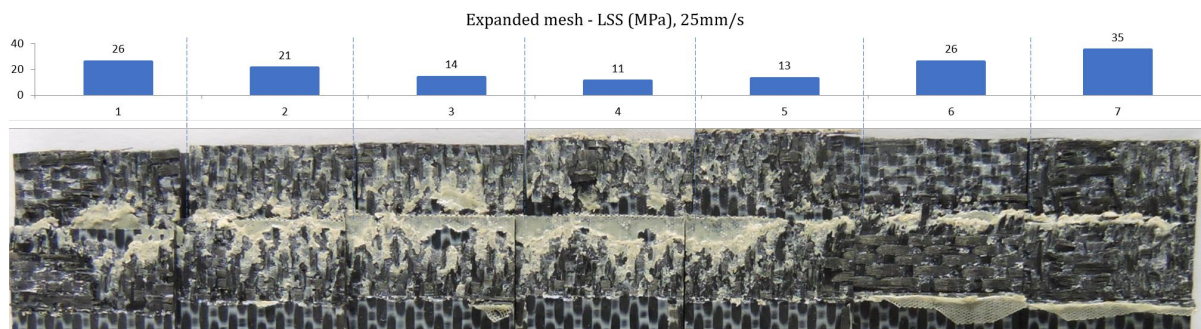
The fracture surfaces at a welding speed of 25mm/s
